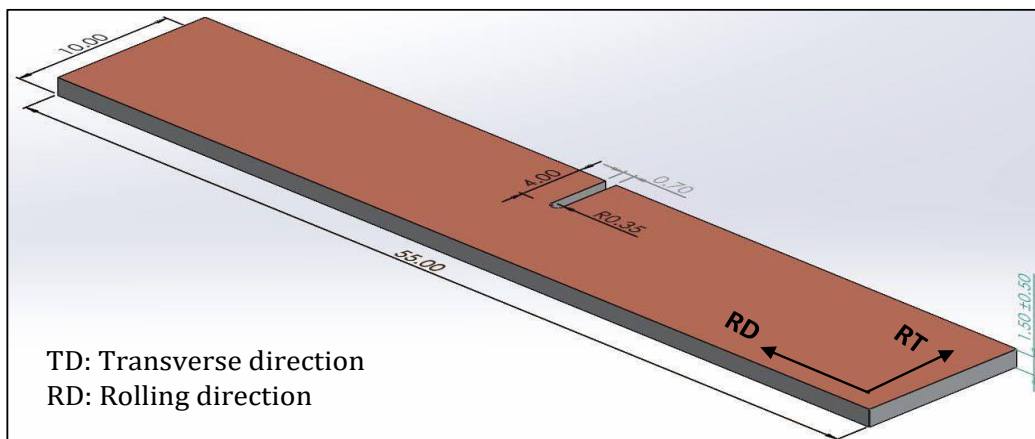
The standard shape and dimensions of the U- notch impact test specimens.
